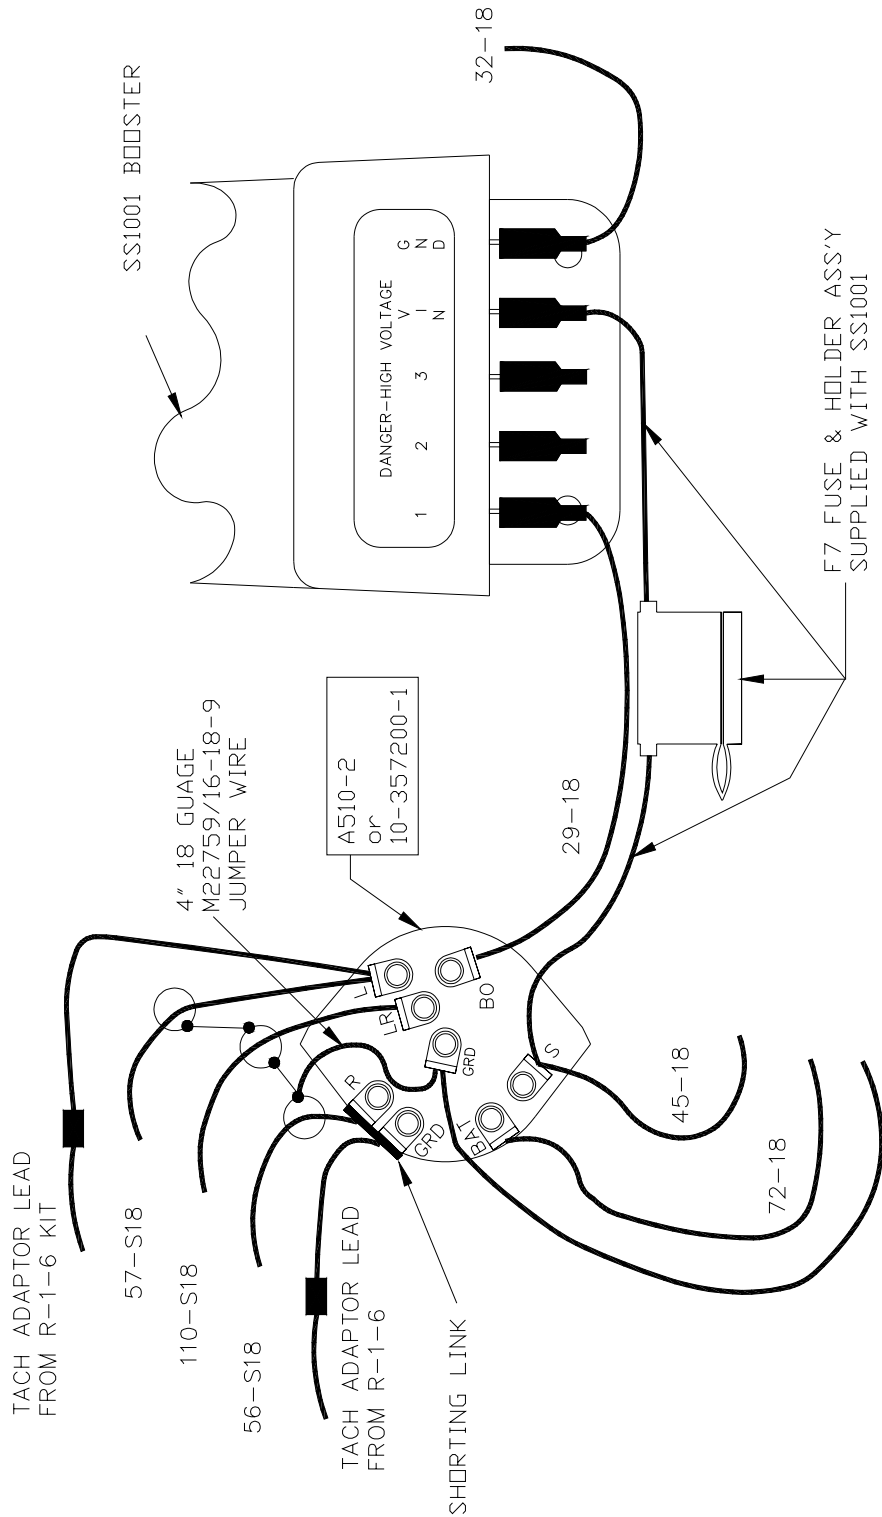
PRE-EXISTING IGNITION SWITCH WIRING
